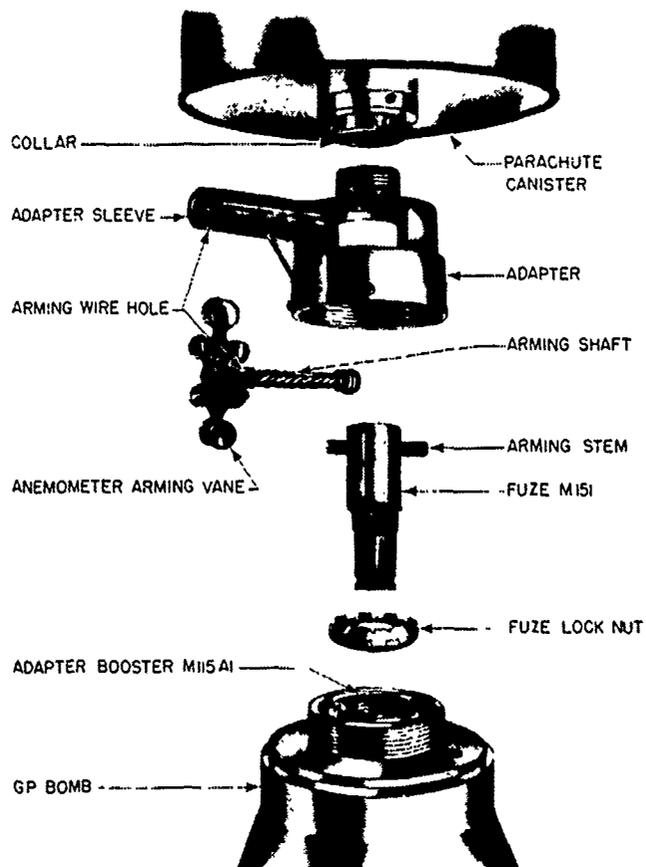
Antiricochet Parachute Assembly (Exploded View).
